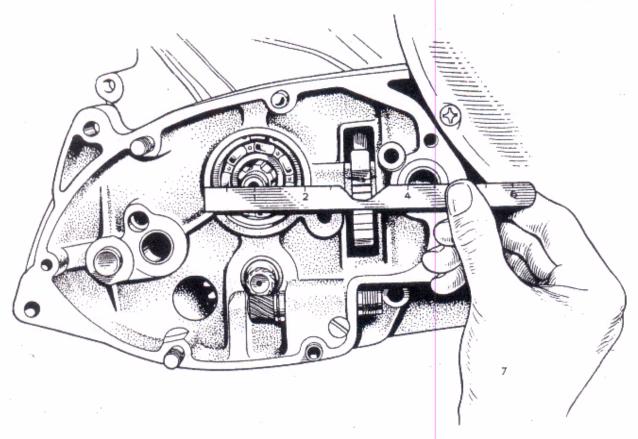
Refitting the gearbox inner cover. Note top of first tooth aligned with centres shown for correct location of gearchange camplate and quadrant
